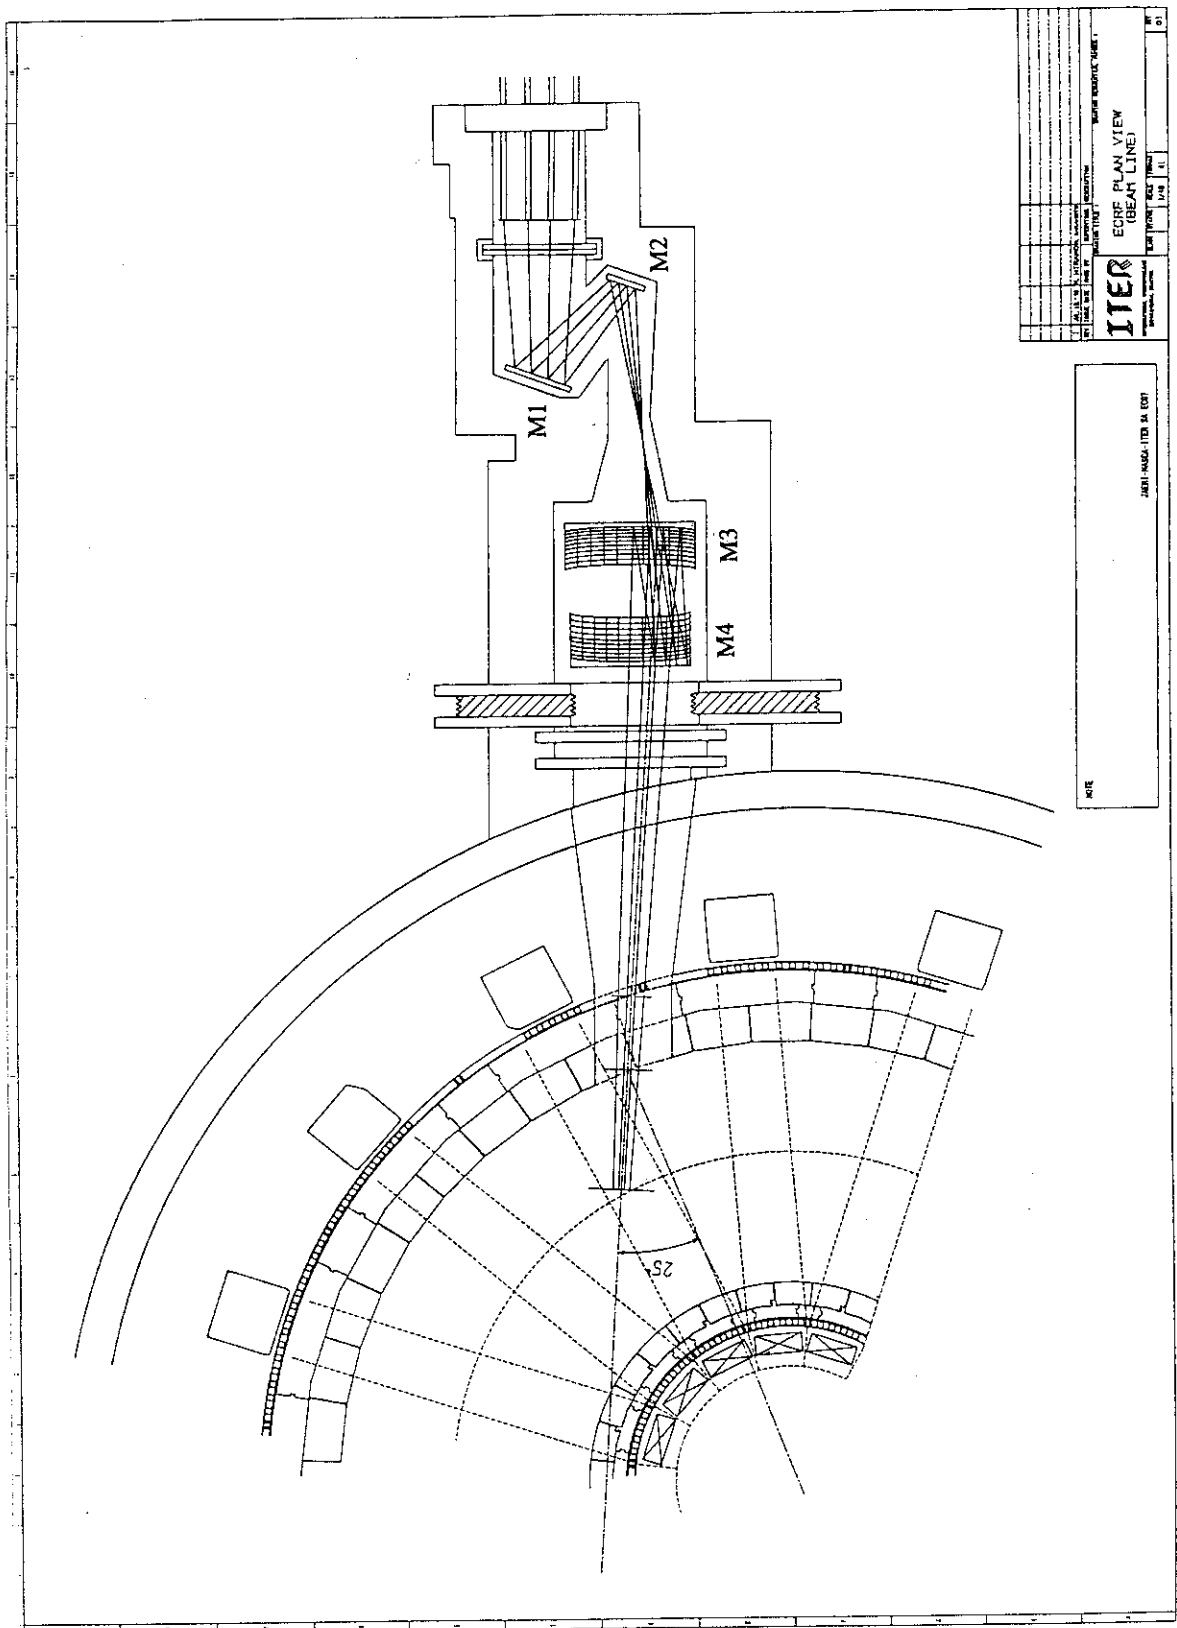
(c) Two-dimensional drawing of the launching system for ITER ECW system, top view with the injection angle of 25°
